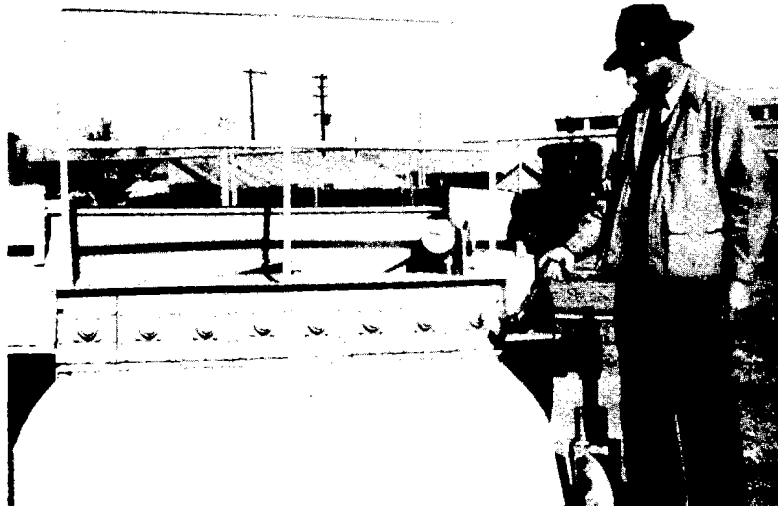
Progressive Assembly of the Cement Spreader. (Continued).
